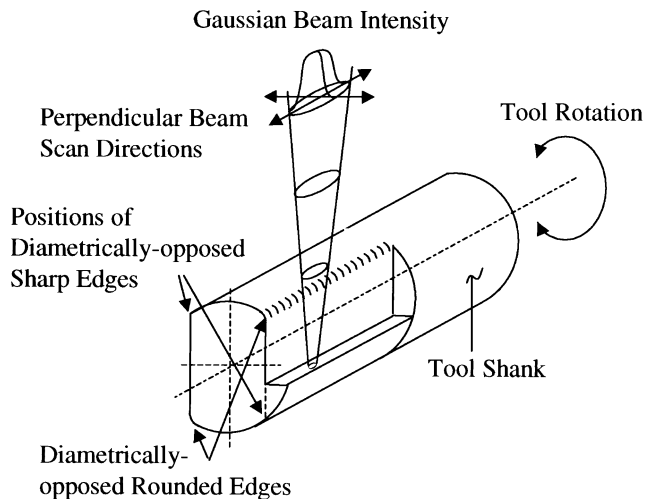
Ion source/sample geometry used for fabricating micro-end mills. Schematic shows tool end.
